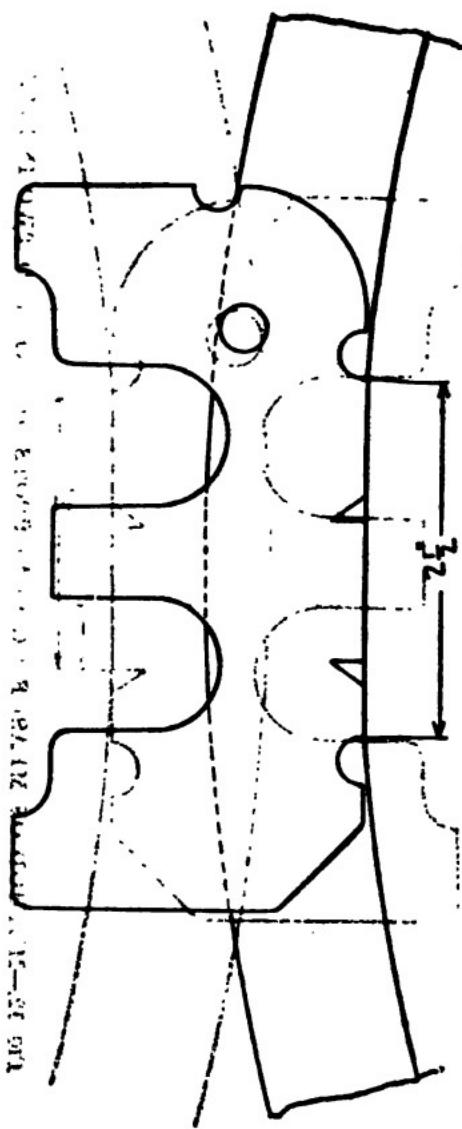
METHOD OF GAUGING SHIELDED AND FLAT SPOTS.
